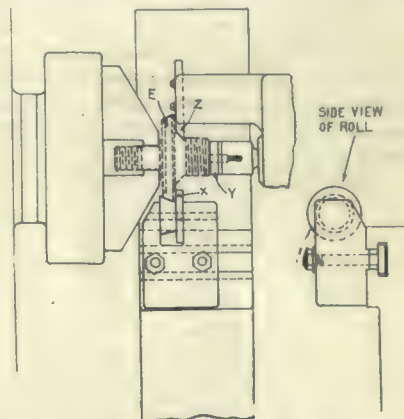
ARRANGEMENT OF TOOLS USED FOR ROLLING OUTSIDE DIAMETER.
